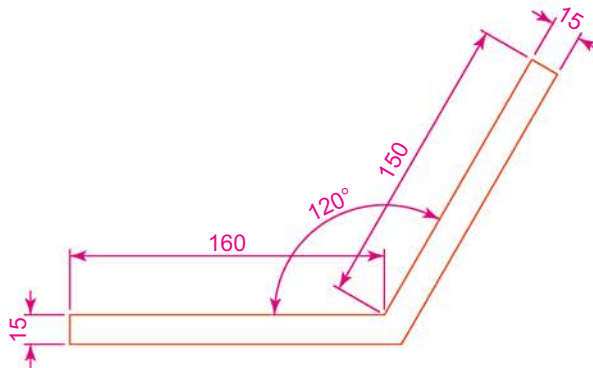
First example – Changing UCS planes – pline for extrusion
